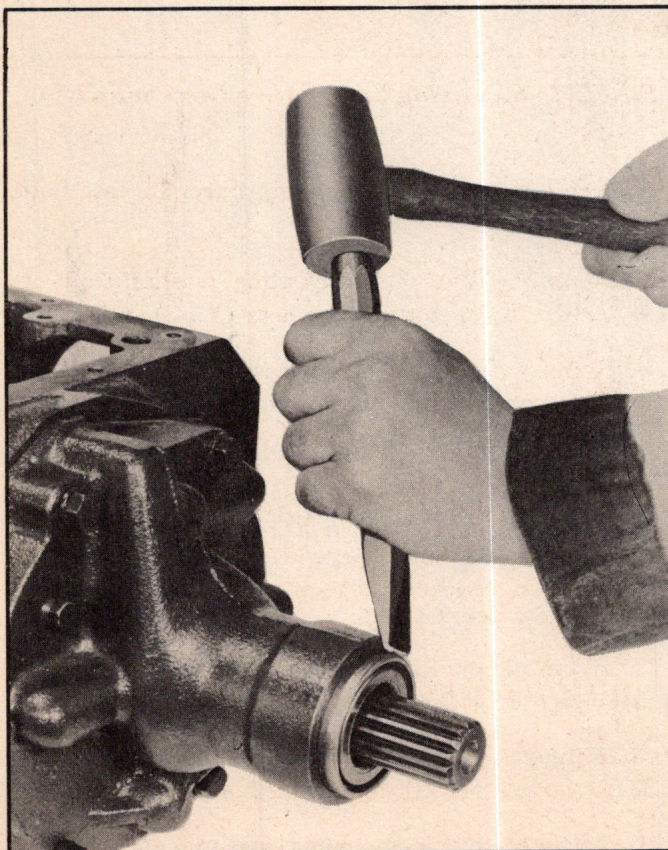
Removing Rear Bearing Retainer Oil Seal
